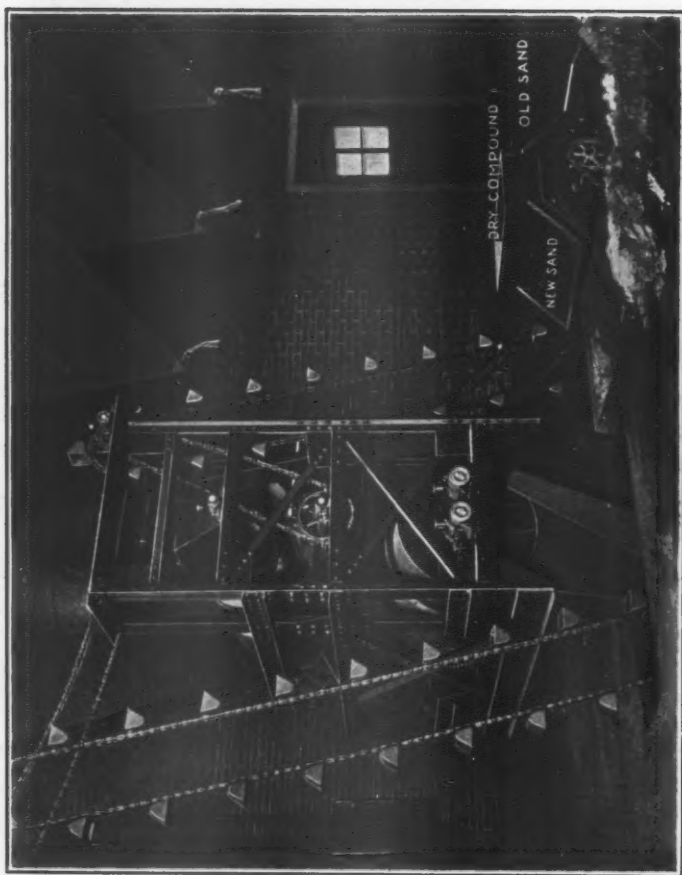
BUCKET ELEVATORS FOR HANDLING CORE SAND.
